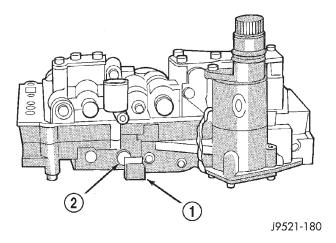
Seating 3-4 Accumulator On Lower Housing
